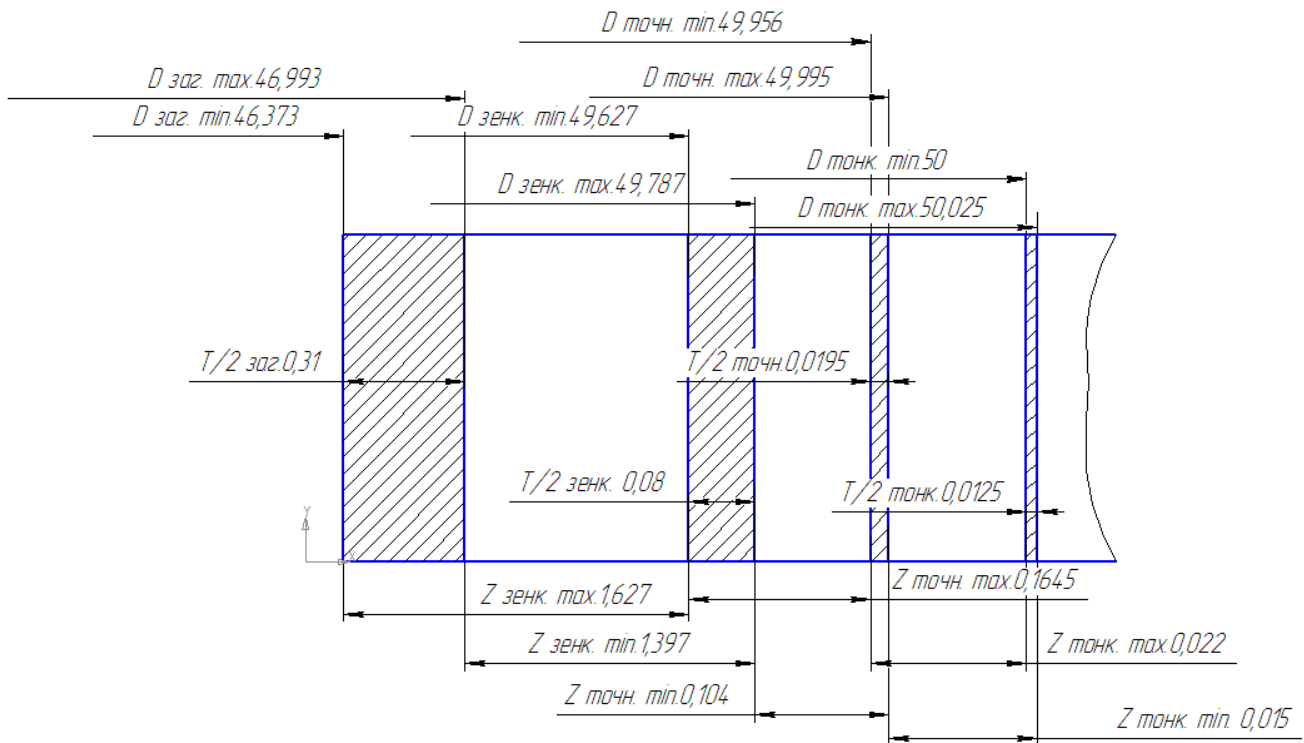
Layout of allowances and tolerances for machining a Ø50H7 hole
